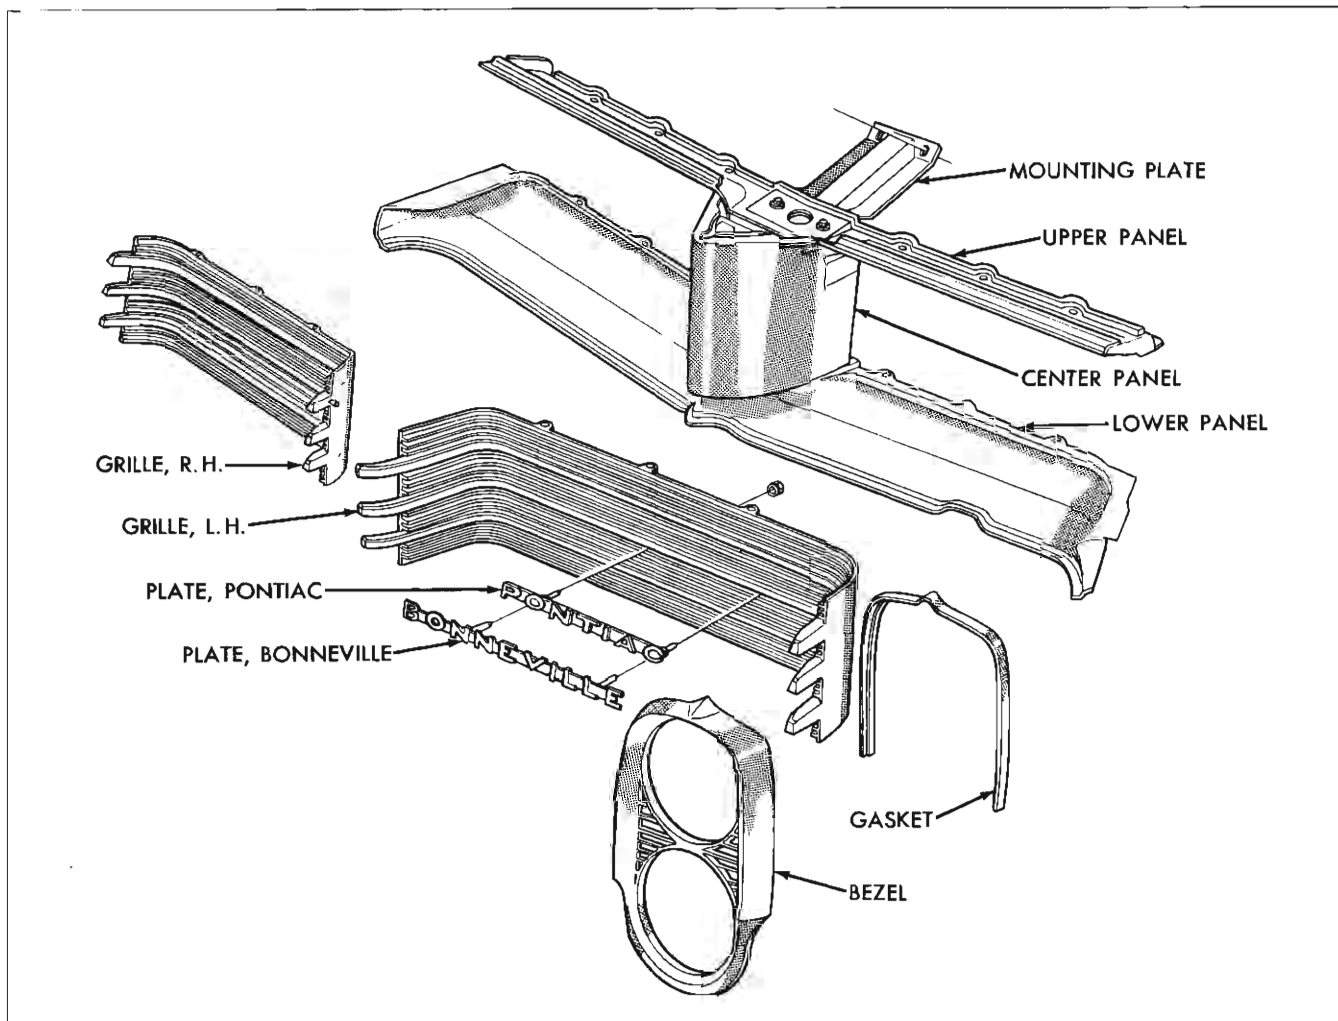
Details of Radiator Grille - Except Grand Prix
